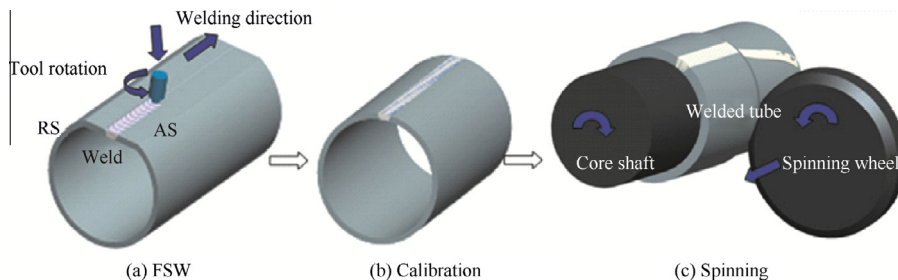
Schematic of tube welding and spinning process.<sup>76</sup>
